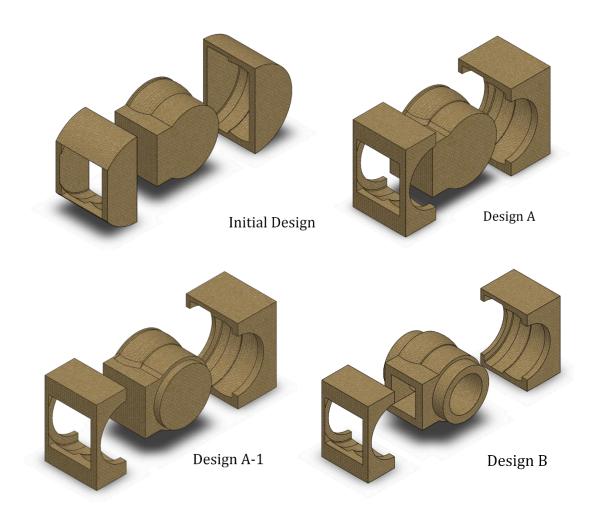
PREVIOUS DESIGNS OF DIE ASSEMBLY
